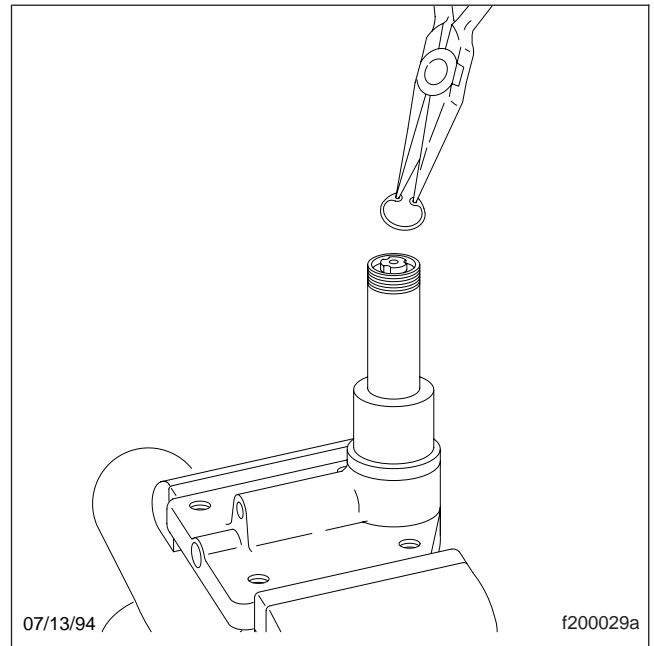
, Retaining Ring Removal and Installation (sheave not shown)
